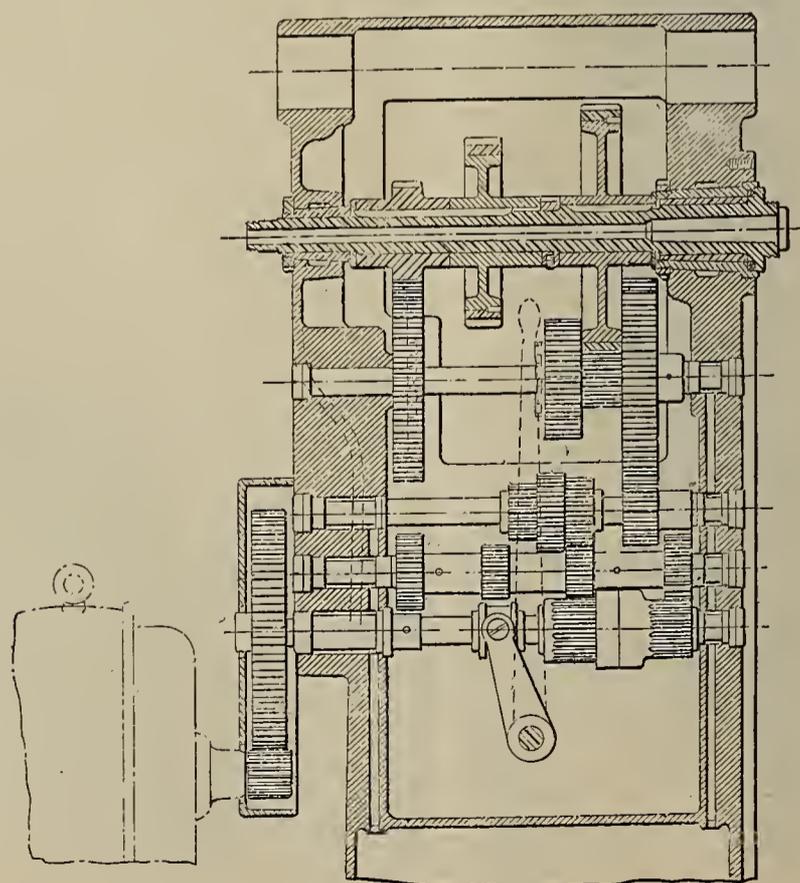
DIAGRAM OF CONSTANT SPEED DRIVE FOR MILLING MACHINE.
